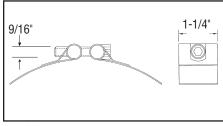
Wide Barrel — 1-1/4" Wide Barrel Assembly Welded to Sheath with 5/16-18 Socket Head Screw
